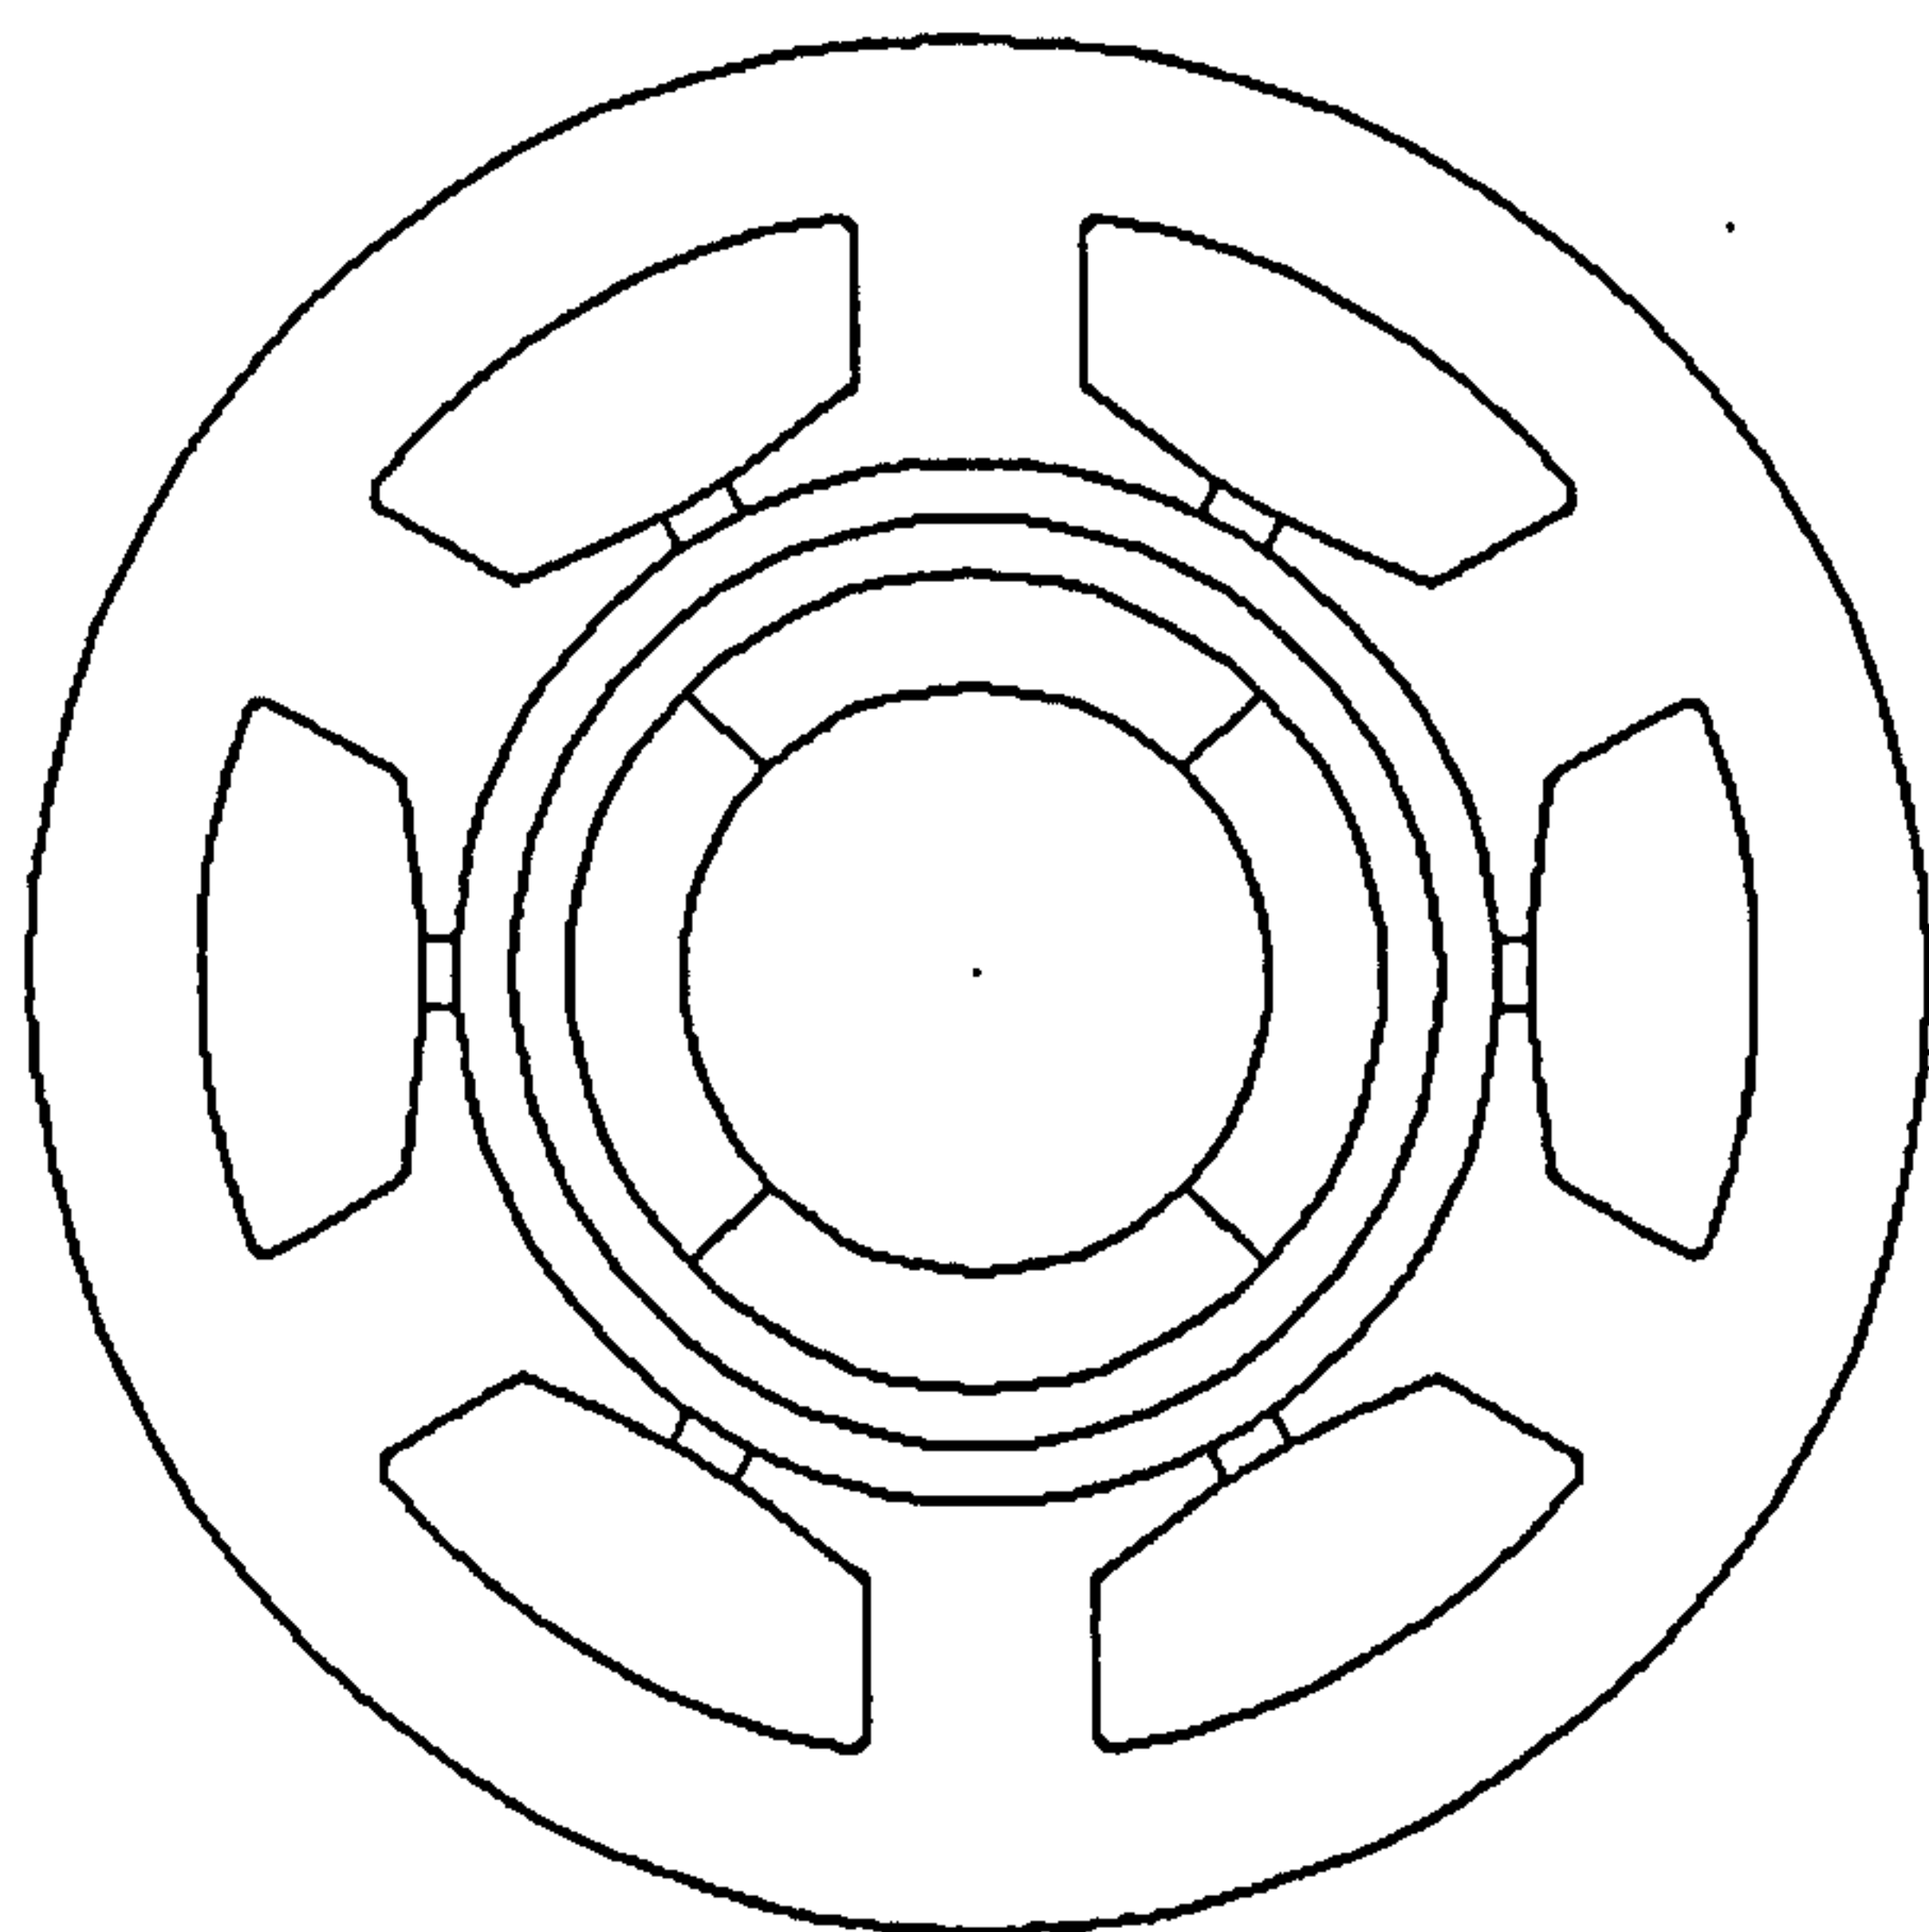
Cross-section of 6-tooth, 4-pole motor (Mk5)
